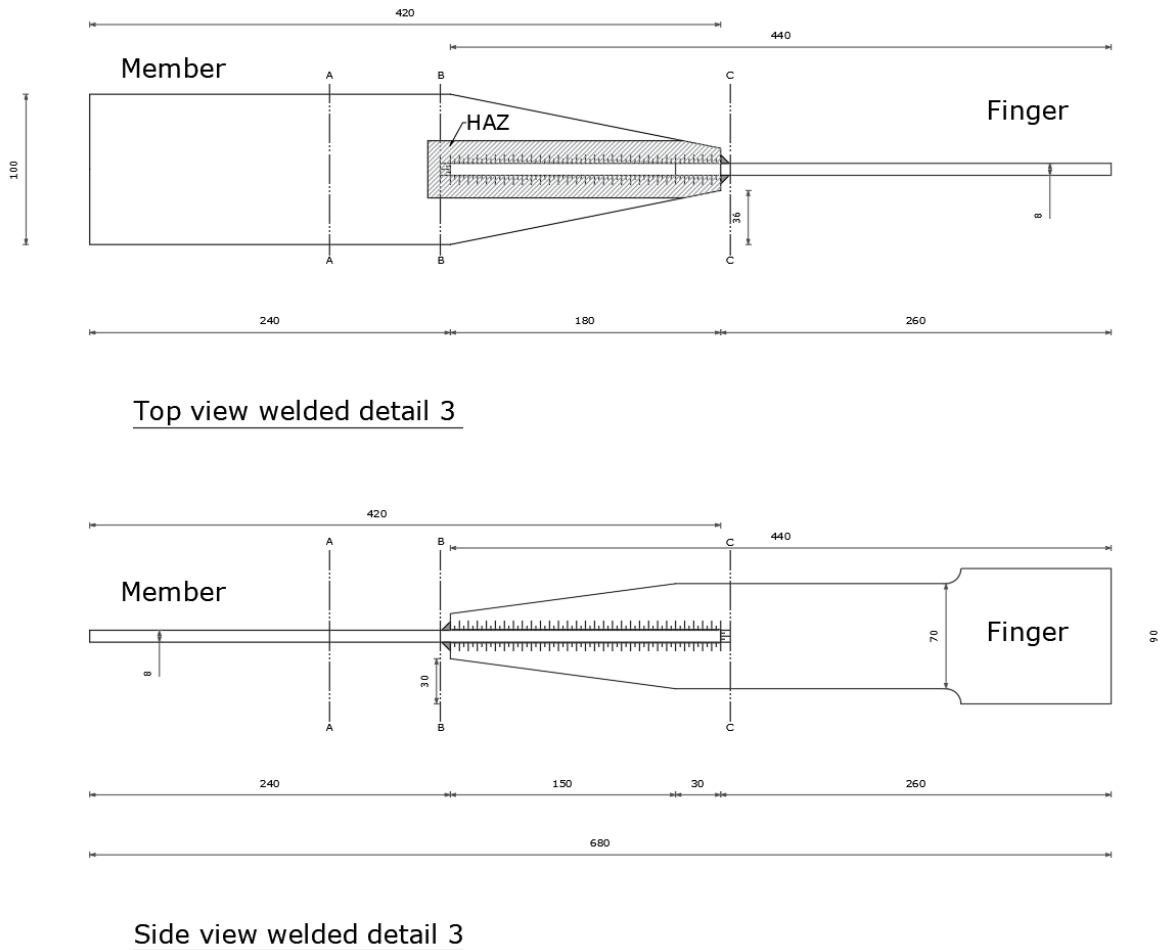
Dimensions of welded cruciform variant 3.
